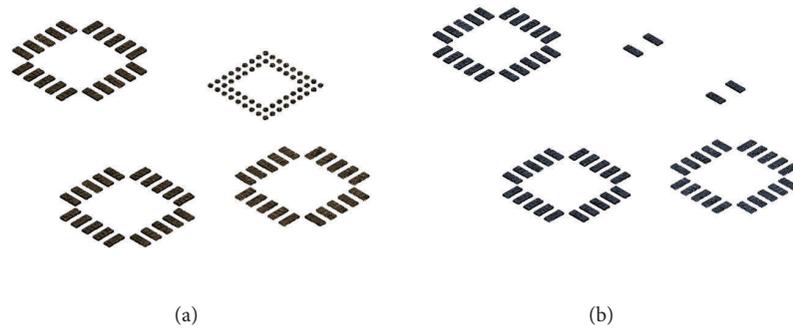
Solder configurations—Top (a) and Bottom Chips (b).
